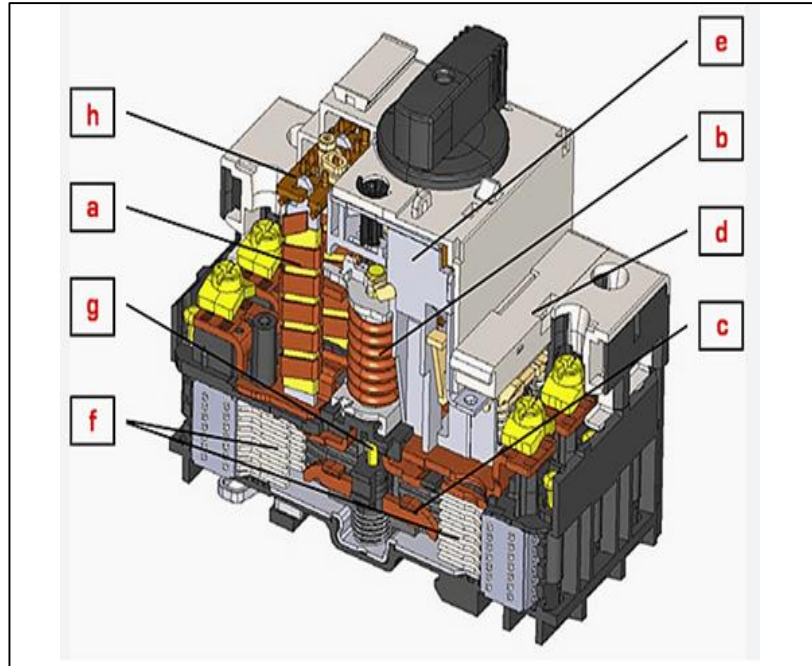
Motor Protection Circuit Breaker (MPCB)
